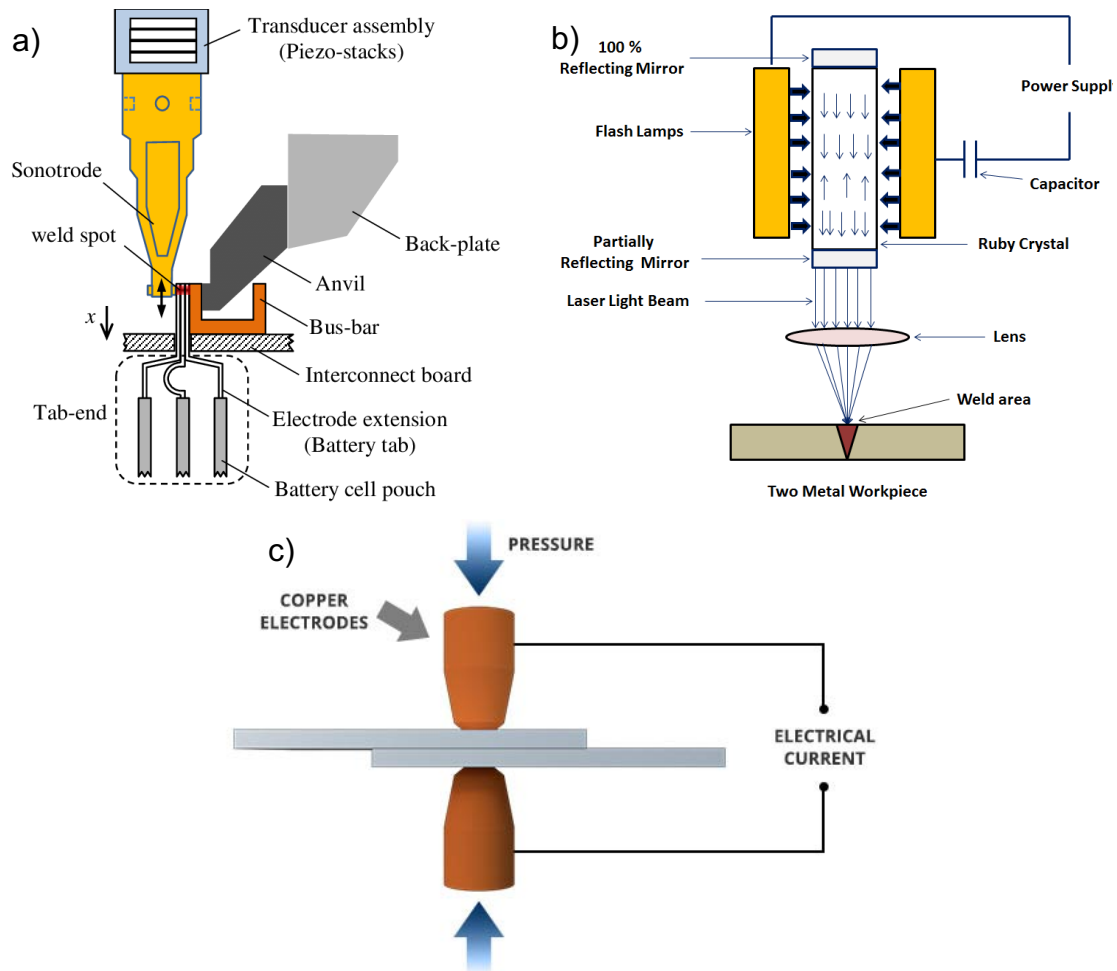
Schematic of a (a) ultrasonic welding[14], (b) laser welding[15], and (c) resistance spot welding setup [16].
